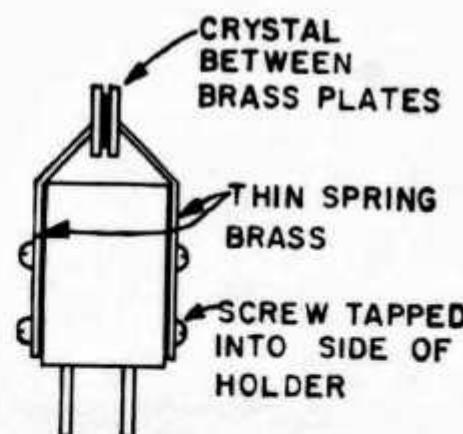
Quick-change crystal holder made by fastening spring-brass strips to the edges of an old FT-243 holder. The brass plates may be taken from old holders.
